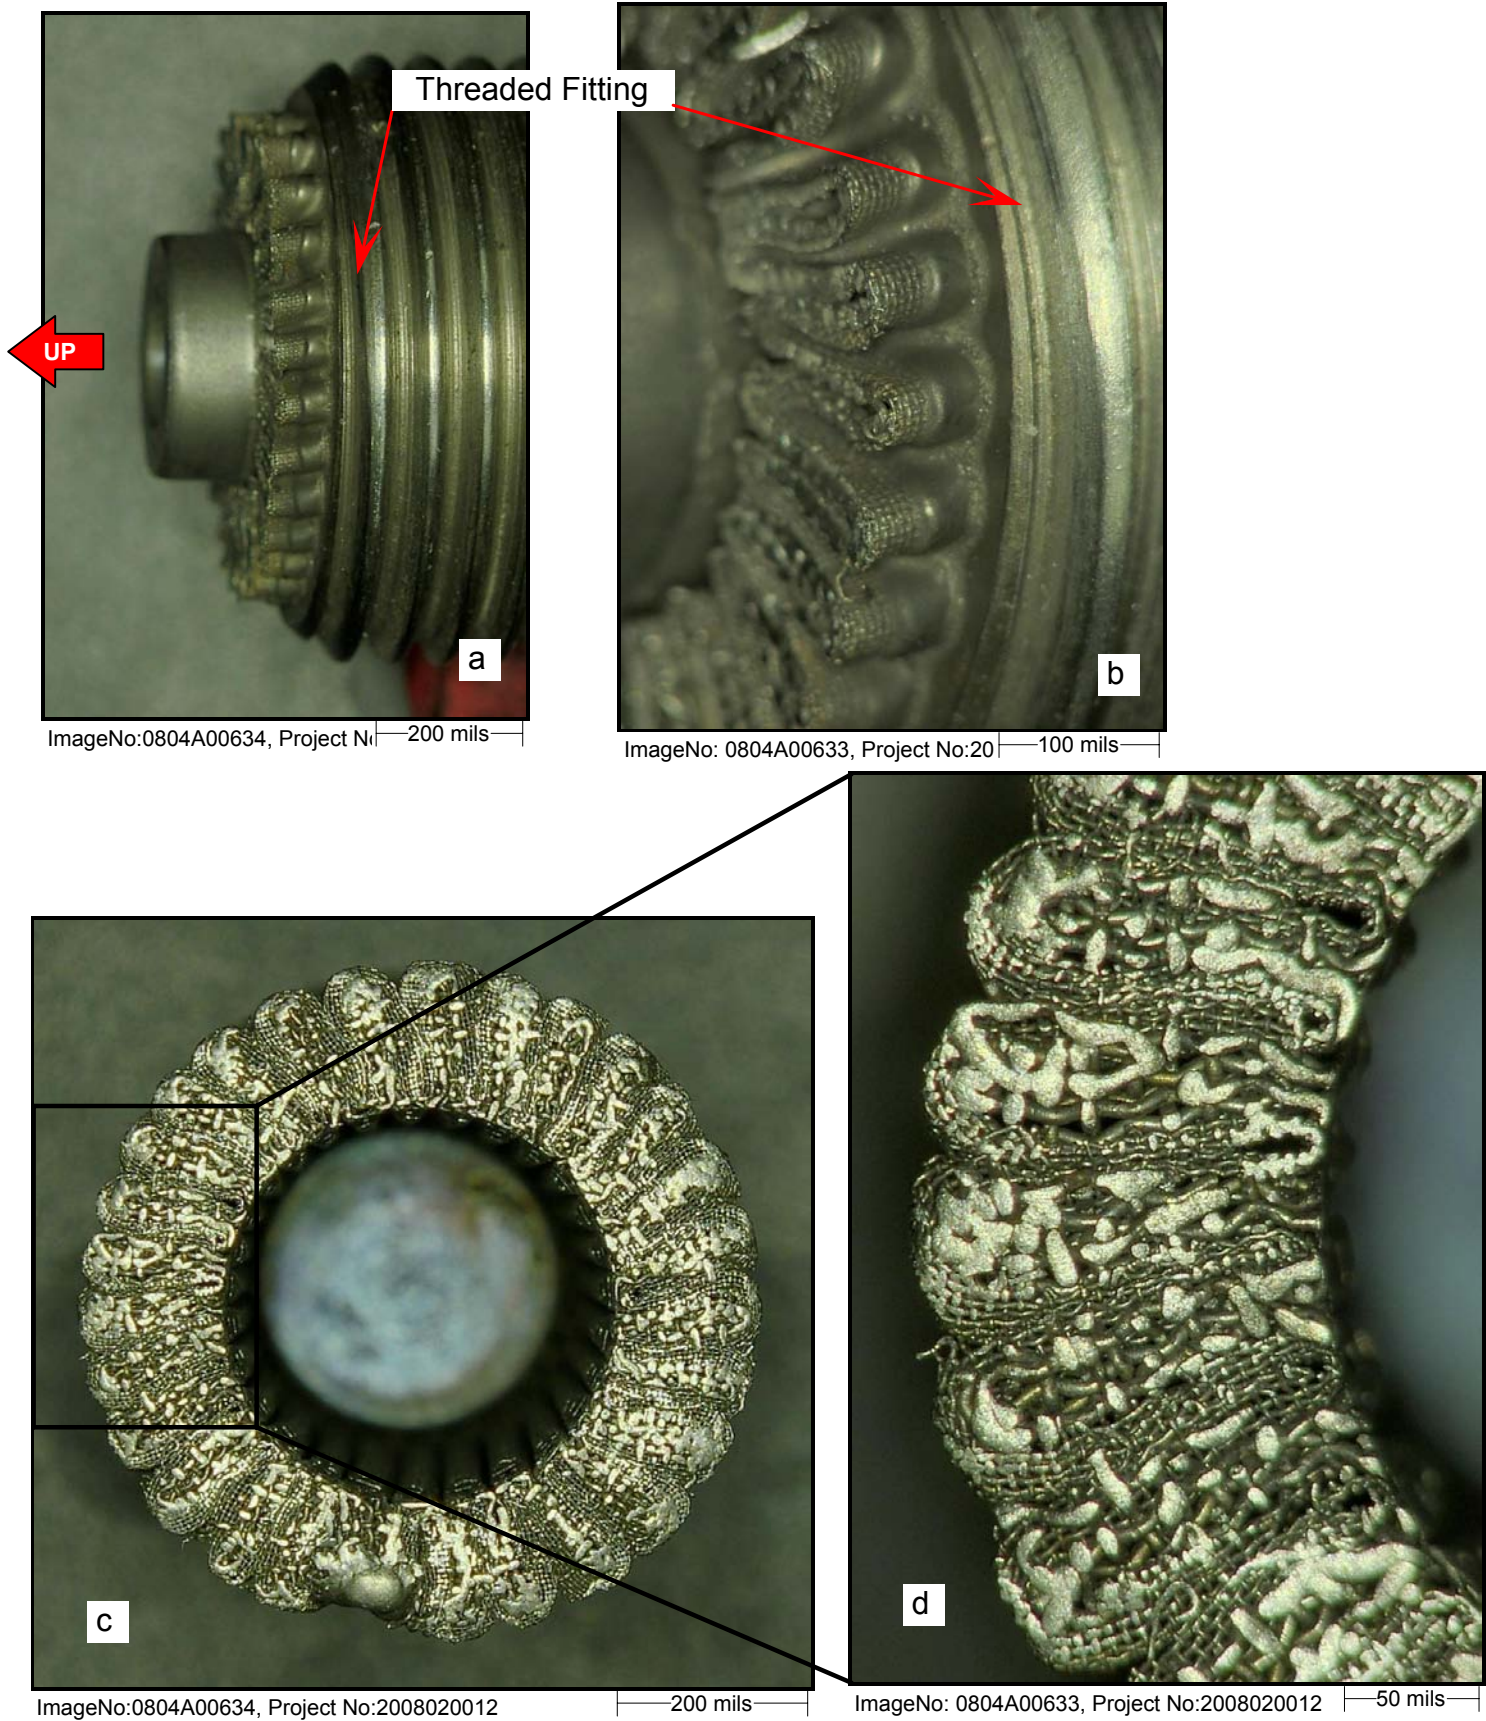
The element separation adjacent to the lower braze line (a) and (b). The damaged element side separation showing extensive damage (c) and (d).
